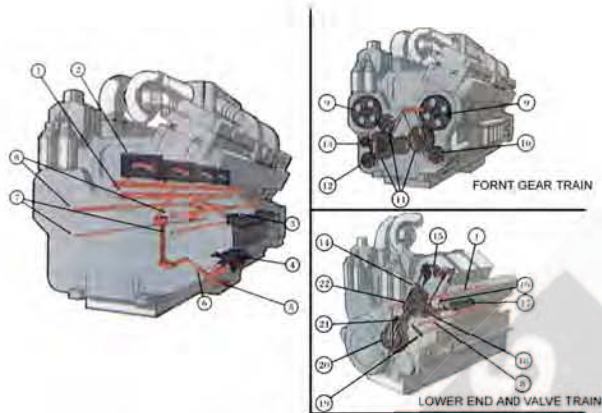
Lubricating oil flow (front view) KTA-38 Engine
